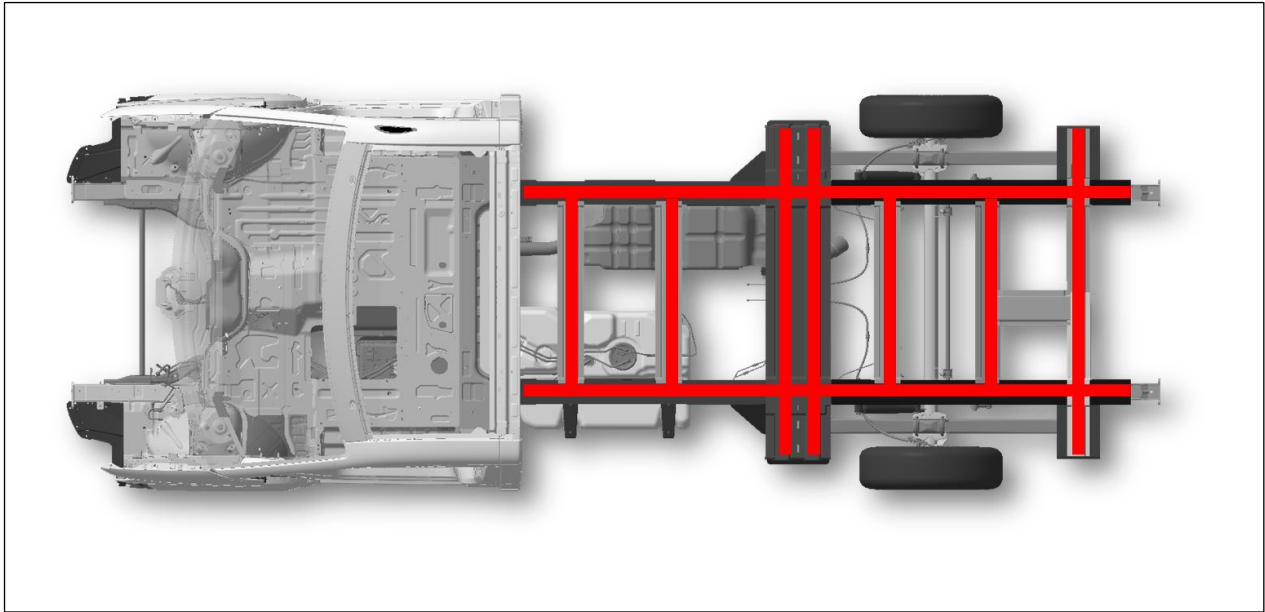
Crafter flat frame chassis adhesive areas for body (illustration of frame area)
